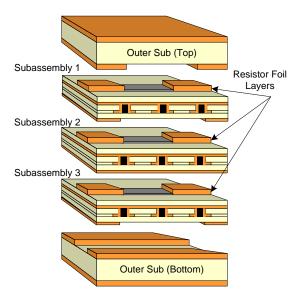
Stack up of multilayer PCB with subassemblies and multiple embedded resistor layers.
